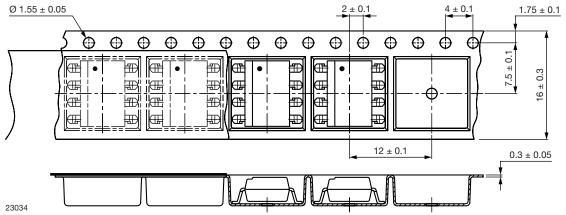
Tape and Reel Packaging (1000 pieces on reel)
